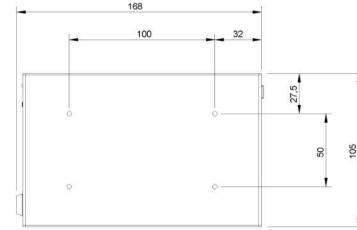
Dimension of DL-975 and position of mounting holes
